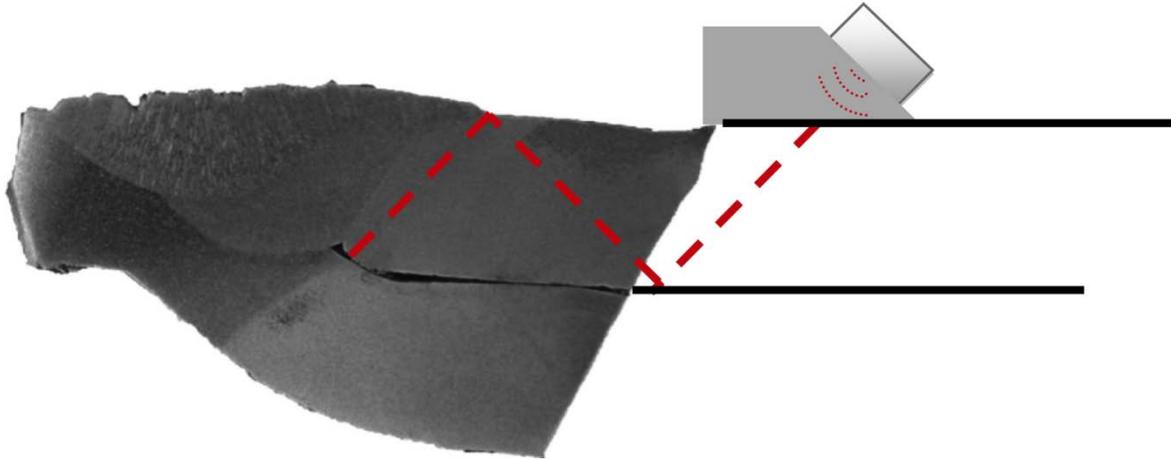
Photograph. A cross section of a lap/joggle joint with a schematic showing why a signal is generated at a weld containing a “blind corner.”
